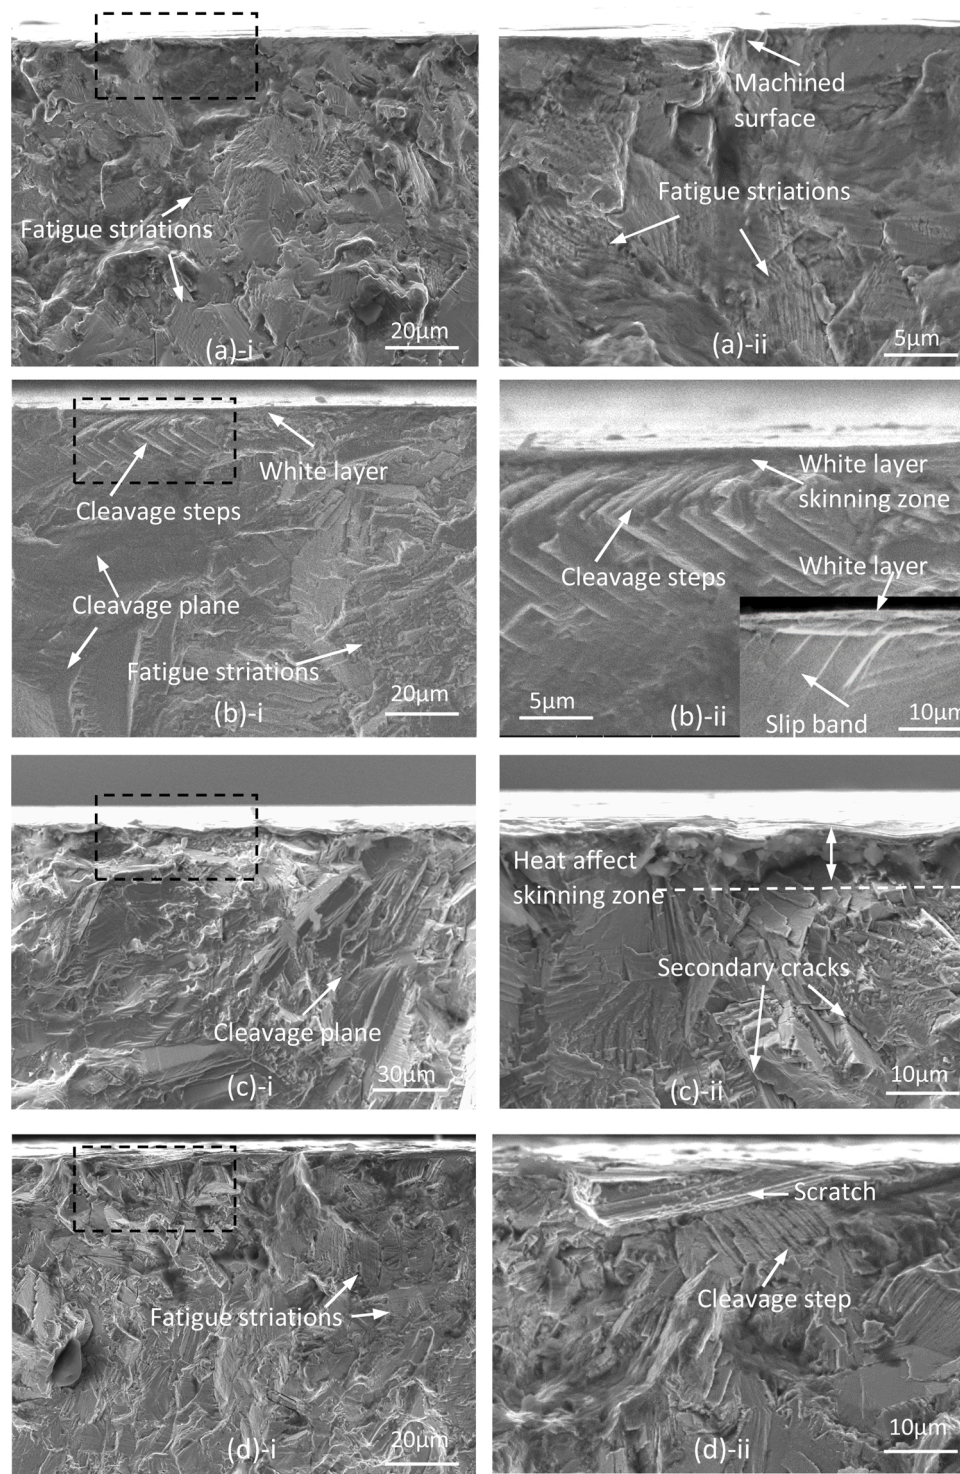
Crack growth morphology on the machined subsurface: (a) conventional finish milling, (b) conventional rough milling, (c) laser assisted machining, (d) abrasive waterjet cutting. All images are collected from the fractured samples under 1250 MPa maximum loading stress.
